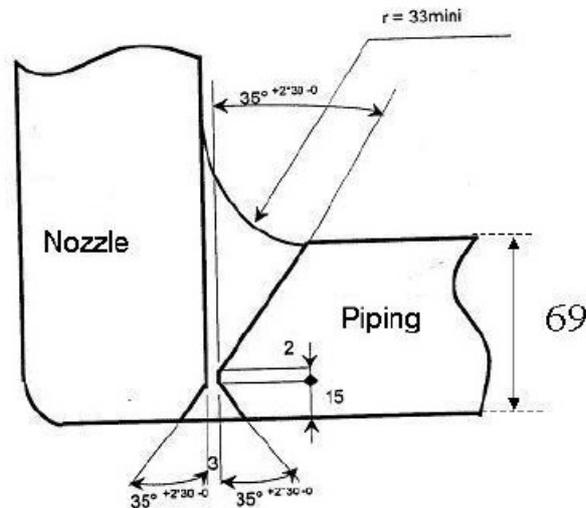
Theoretical dimensions of the weld of a CVCS set-in branch pipe
